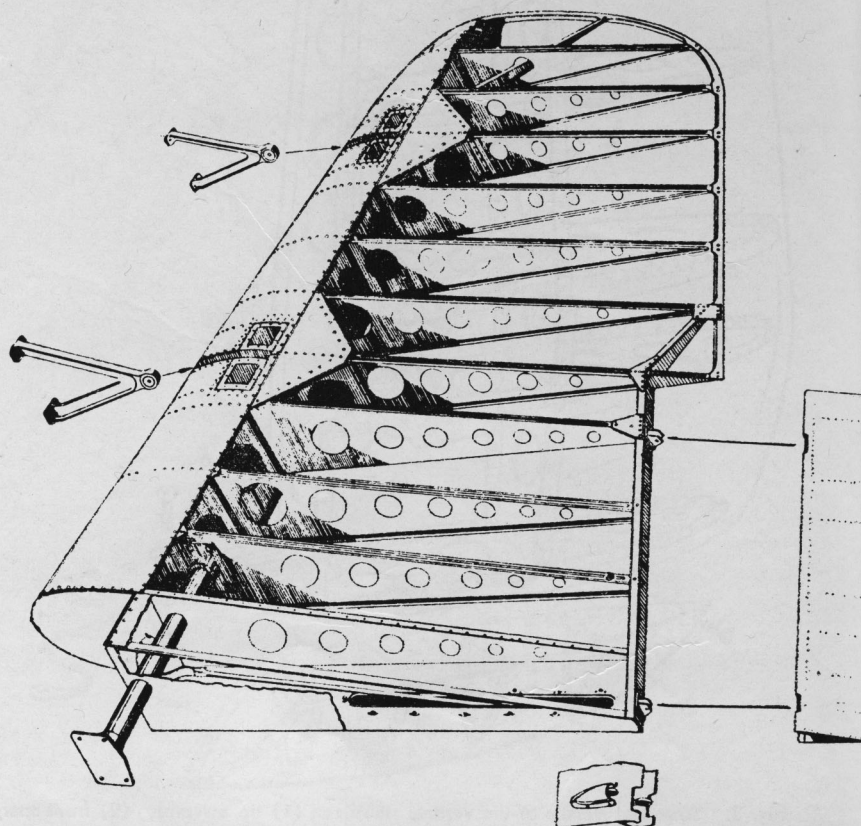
The rudder is fabric-covered over an alclad frame and L.E. The tab is operated at the bottom by a rod in the recess shown. Lower recessed alclad sides are secured by $\frac{9}{32}$ rivet nuts.
